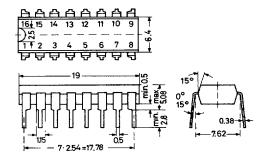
Plastic Package 20 A 16 according to DIN 41870 Weight approx. 1.1 g, Dimensions in mm
